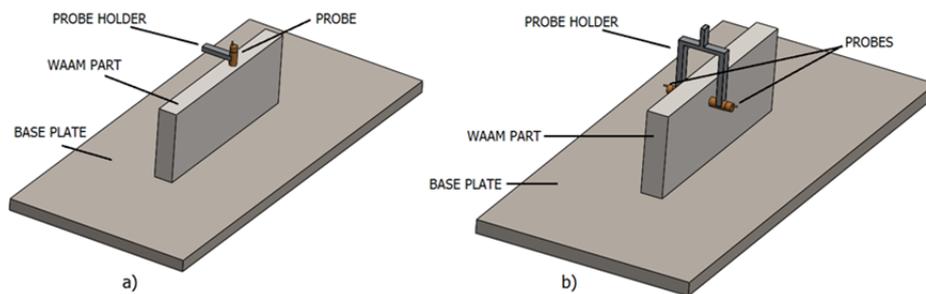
Simplified preview of possible solutions for ultrasonic testing of WAAM parts
